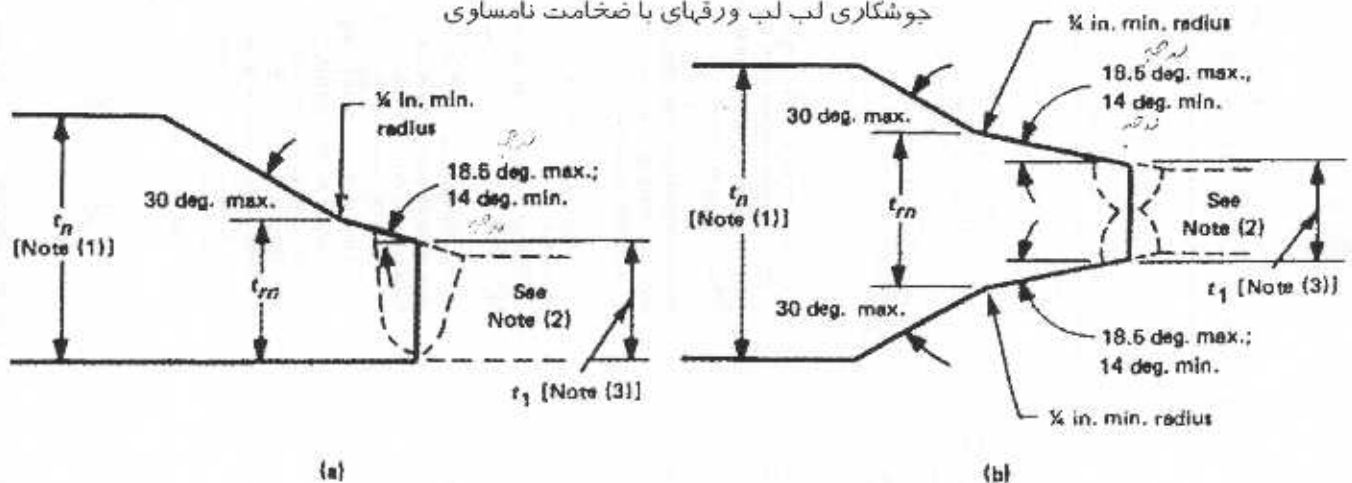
BUTT WELDING OF PLATES OF UNEQUAL THICKNESS
